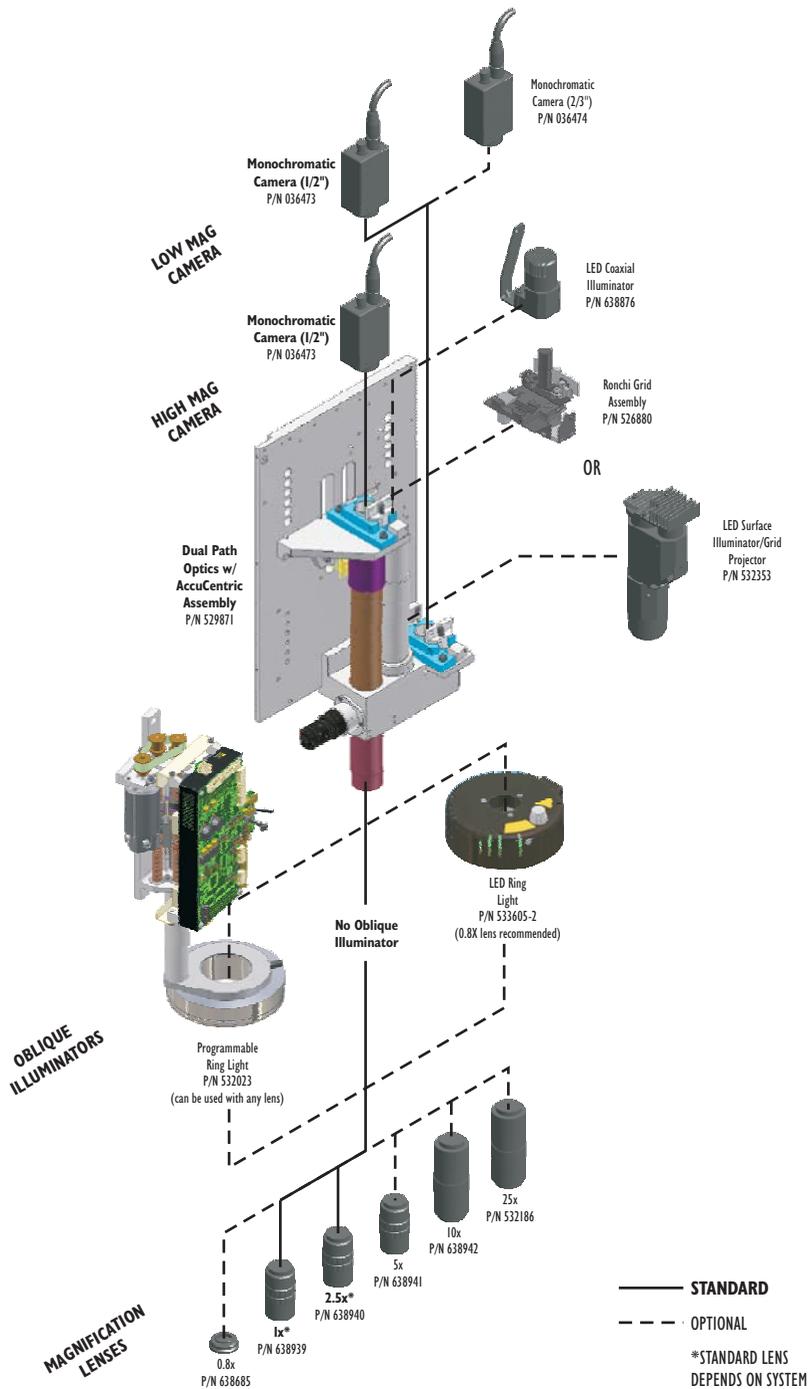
Systems Equipped with AccuCentric Assembly (No Laser)
